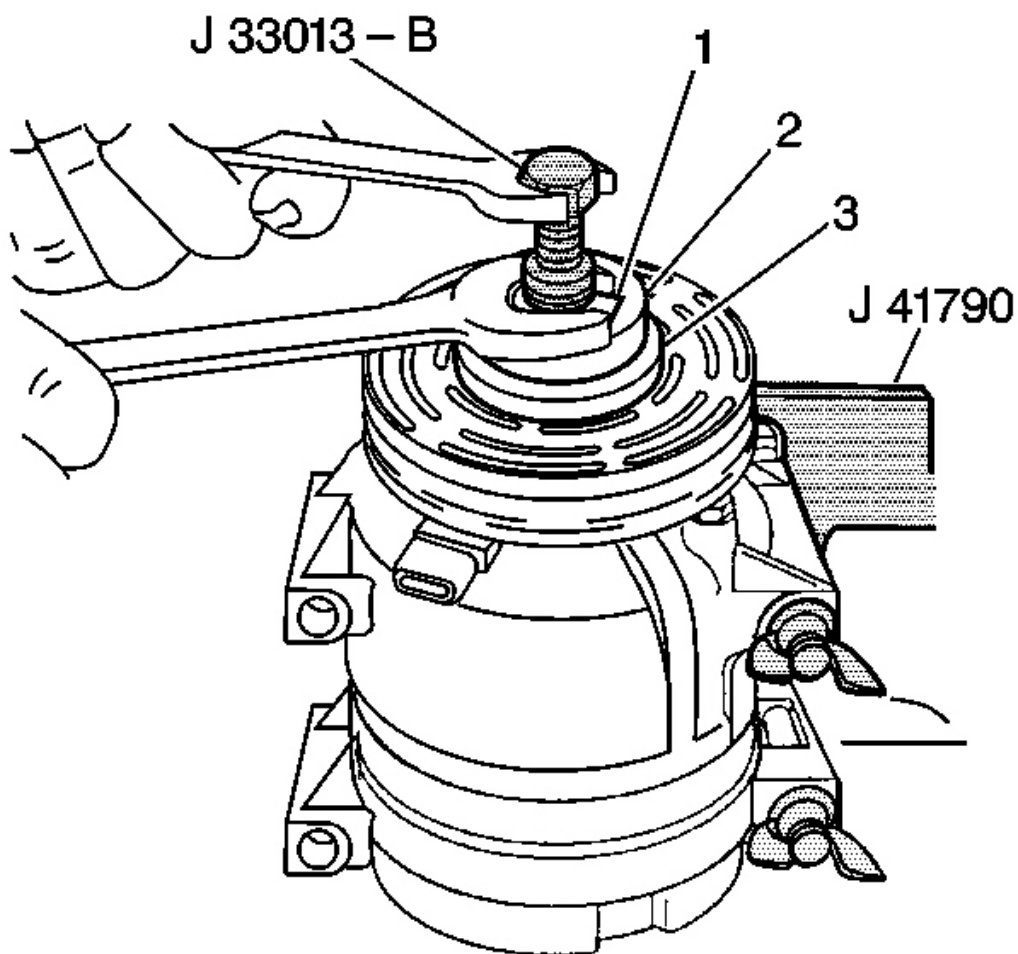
J 33017, J 33013-B, A/C Compressor Clutch Rotor & Bearing Assembly
